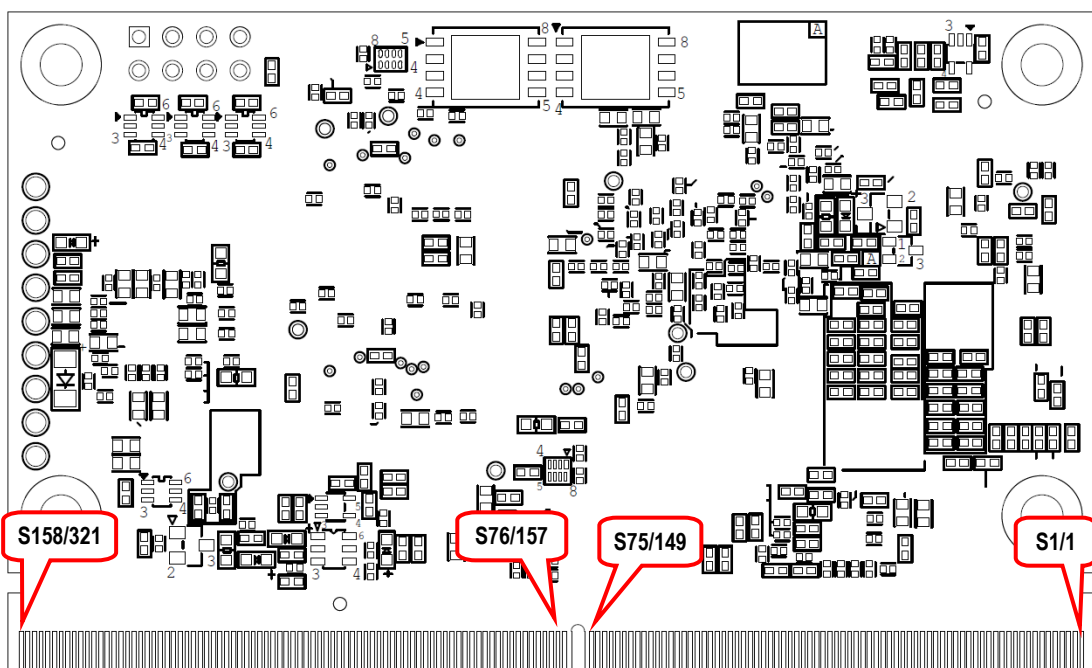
EACOM Board Pin Numbering, Secondary/Bottom Side
